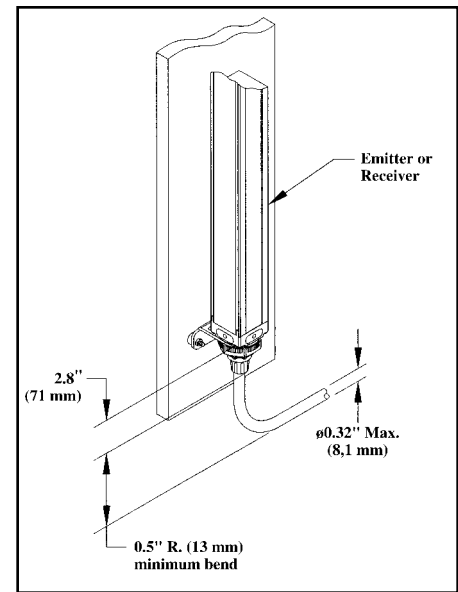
Quick Disconnect Cable Clearance Dimensions.
